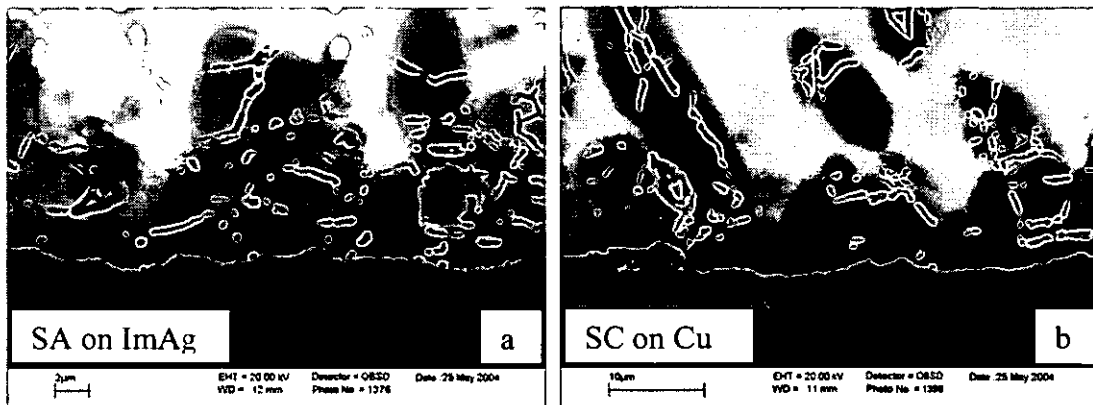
Solder joints with cracks in the IMCs after the initial polishing.
